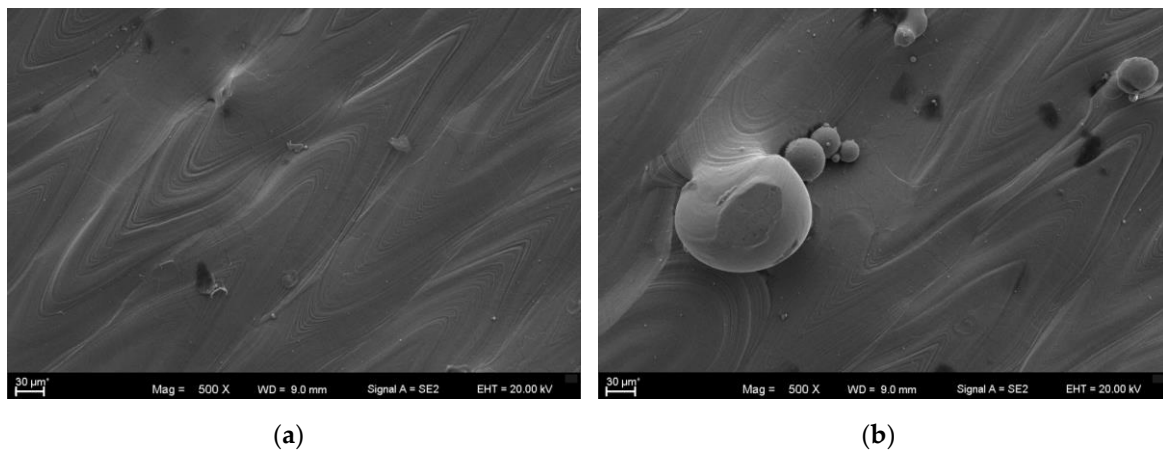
Typical surface defects and discontinuities: (a) collapse of the welding pool; (b) partially melted titanium powder [100].
